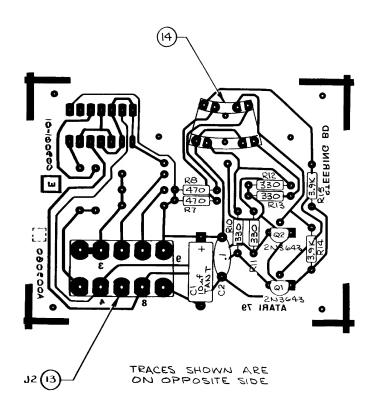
Steering Board Assembly A009060-02 $\,$ C
